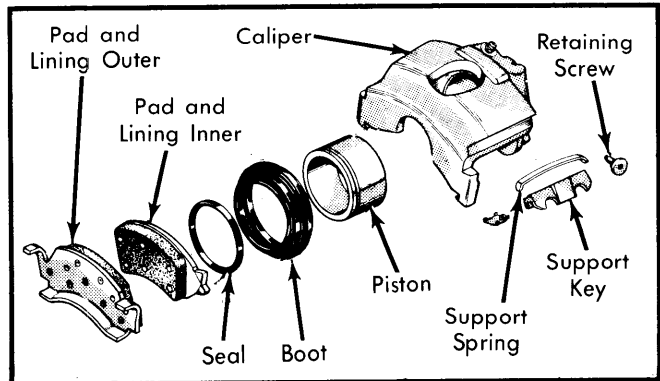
Exploded View of Bendix Single Piston Disc Brake Caliper
